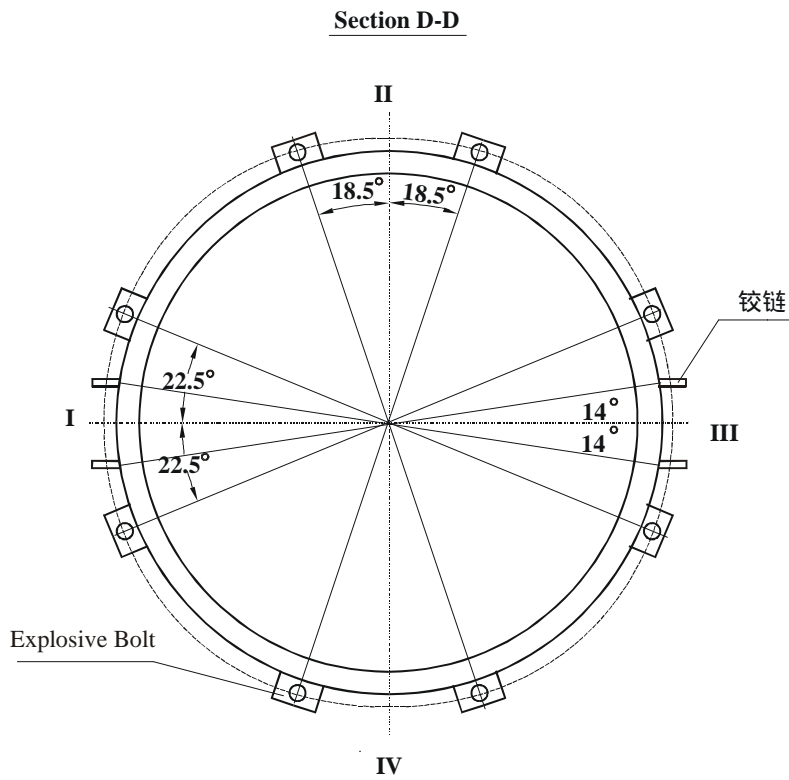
Distribution of the LV Lateral Unlocking Explosive Bolts
